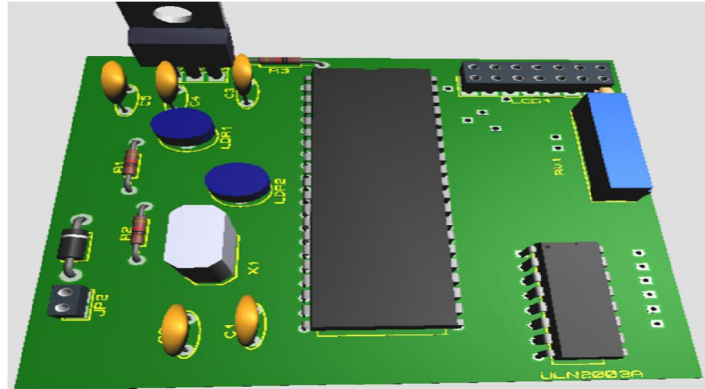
Front view (view of the board from the front side) of 3D Visualizer
